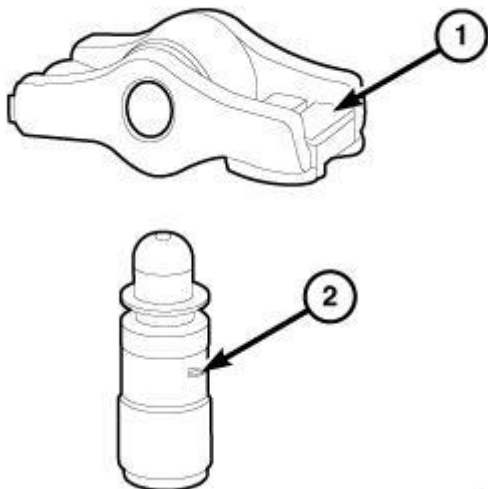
Hydraulic Lifter & Rocker ArmCourtesy of CHRYSLER LLC
